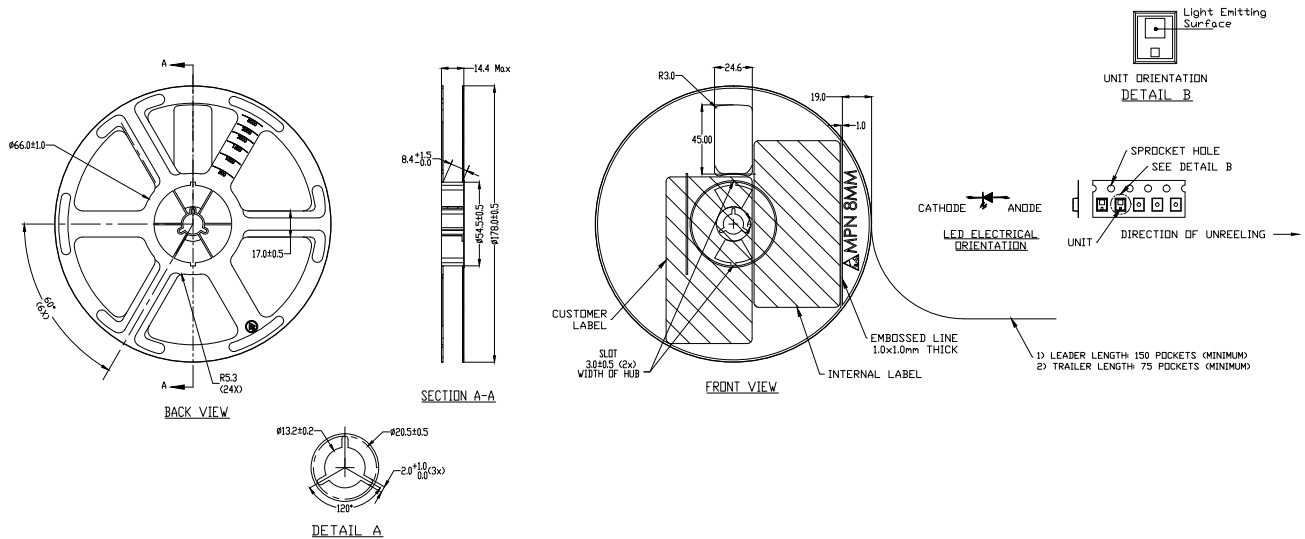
Reel dimensions for LUXEON F ES Cool White.
